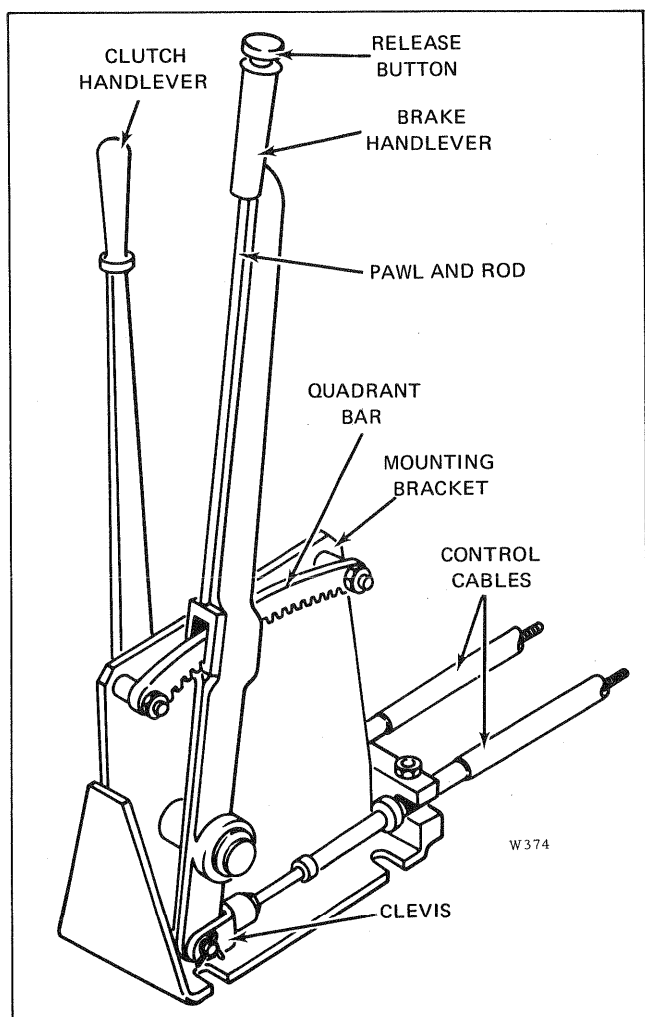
DIRECT DRIVE HANDLING GEAR
